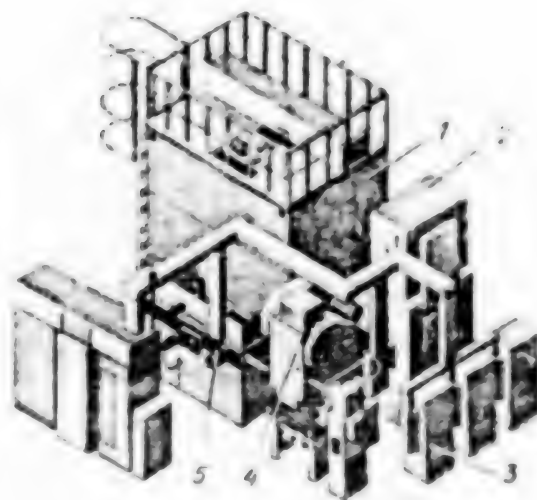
GP module for stamping parts from strip intermediate products using a single-crank 630 k newton open press.
